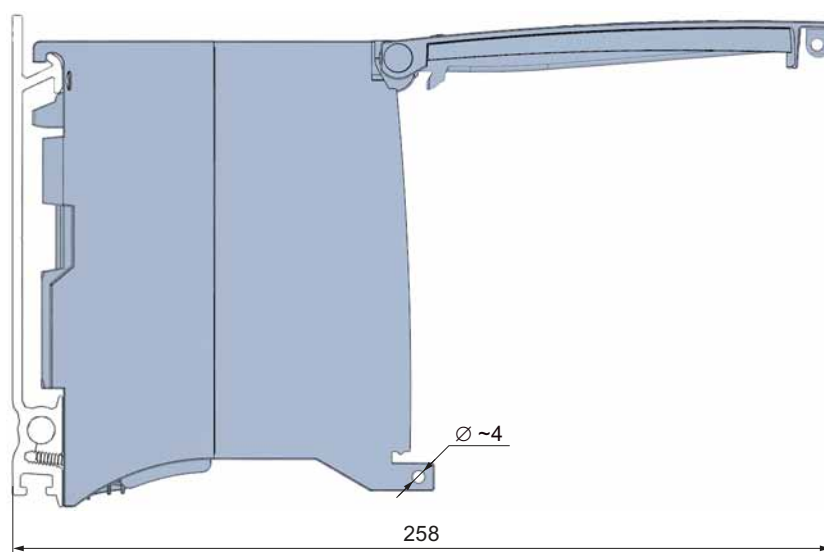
Dimensional drawing of CPU 1511-1 PN, side view with front panel open
